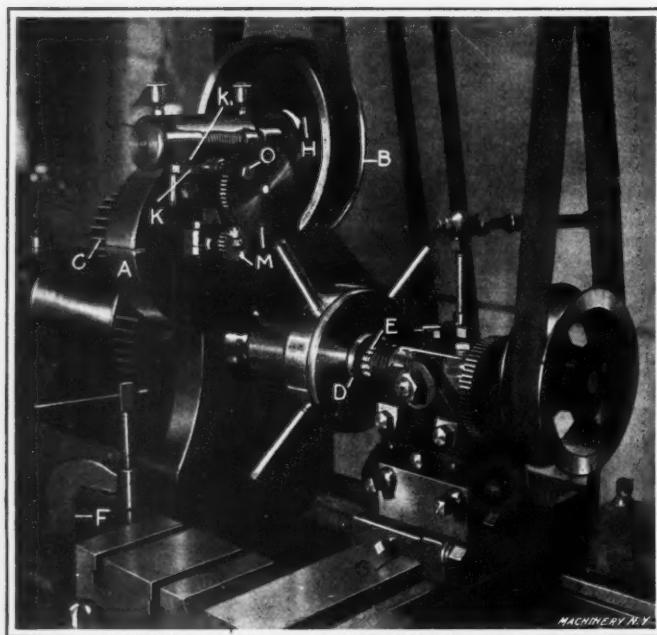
New England Butt Co.'s Thread Milling Attachment for the Lathe milling the coarse thread on the outside of the ogive for 70-millimeter shrapnel shells, and has now been in operation for a sufficient length of time to fully demonstrate its ability to give satisfactory results as regards both finish and rate of production.
